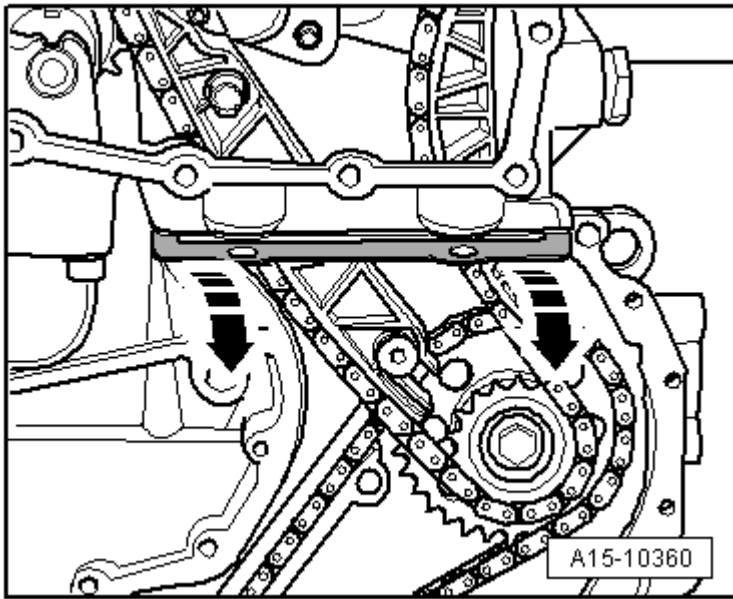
Bending End Of Cylinder Head Gasket Down Slightly
